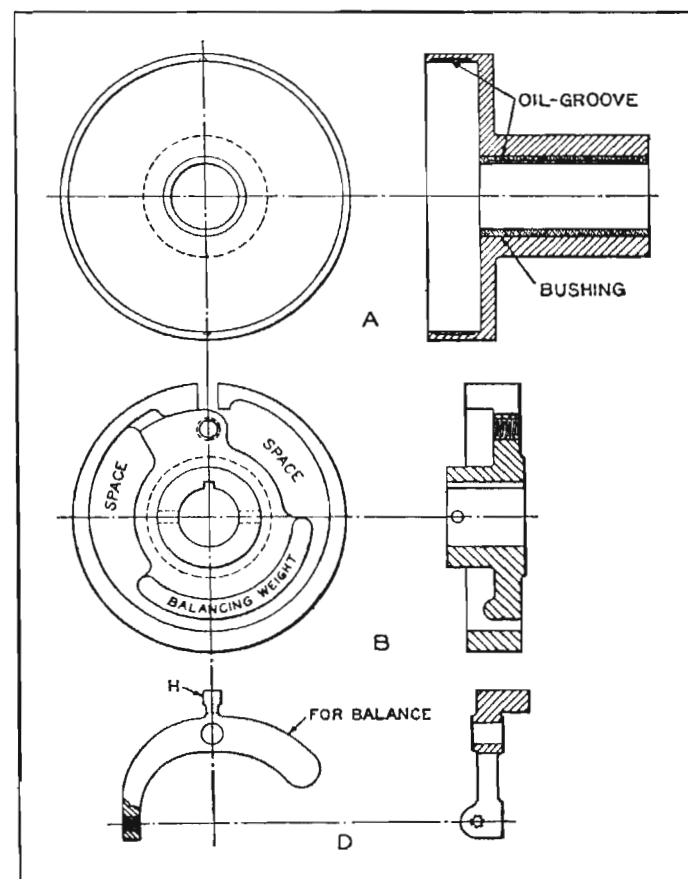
Detail of Parts Comprising Clutch Shown in Fig. 24.
